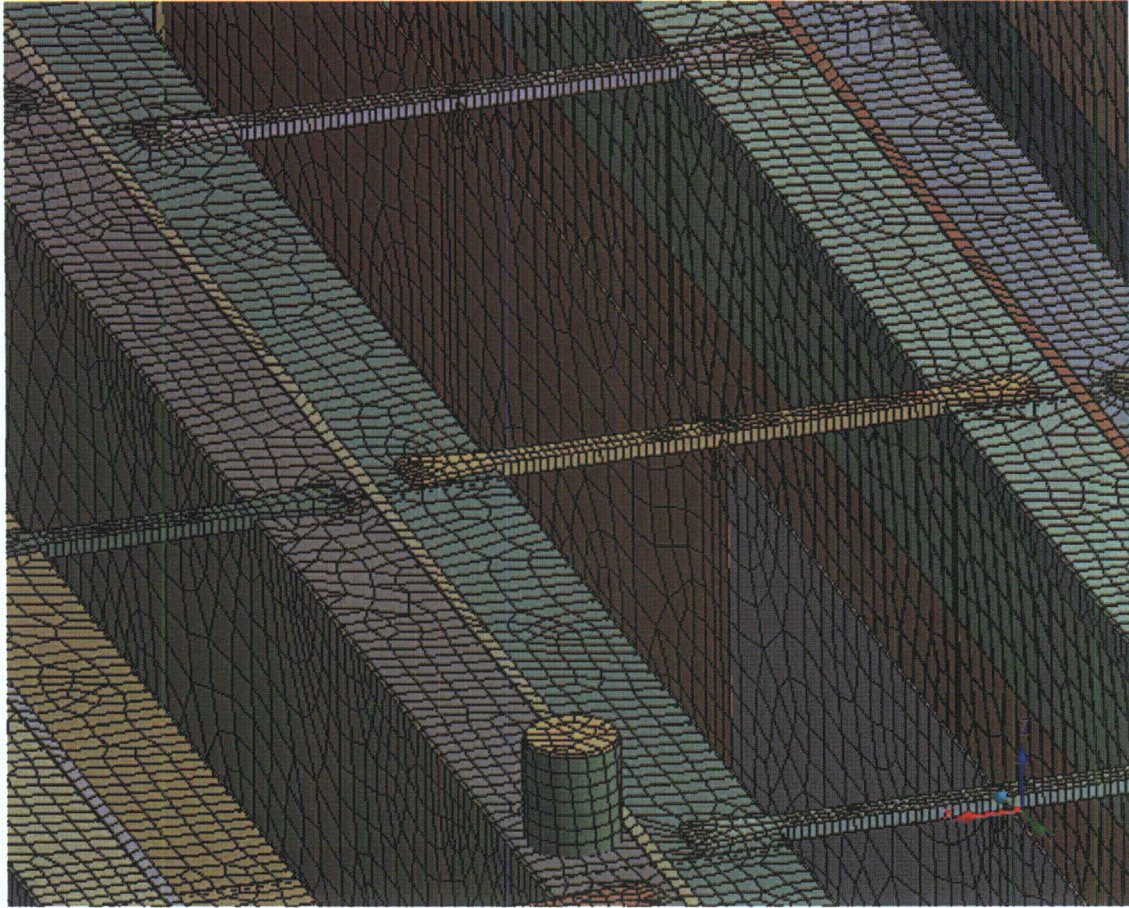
Close-up view of tie bars connecting inner vane cover plates and baffle plate steam dam.
